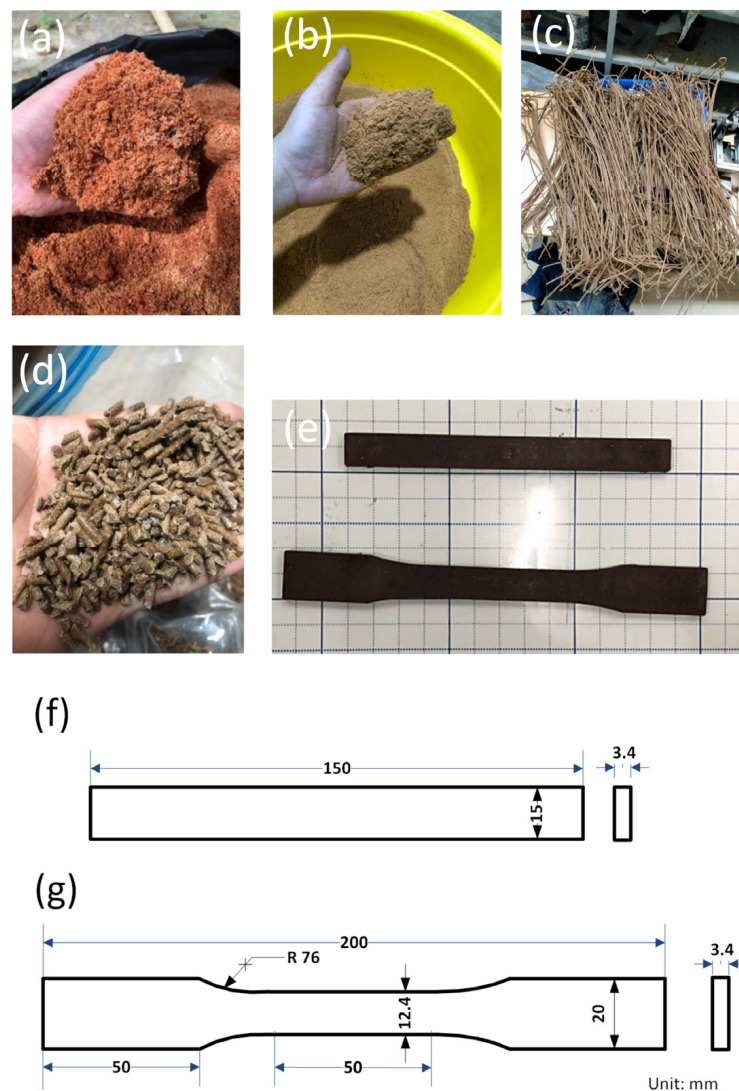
Sample preparation process: (a) coconut WP before filtering; (b) coconut WP after filtering; (c) coconut WP and PP after extrusion; (d) granulation; (e) tensile and flexural injection samples; (f) flexural sample dimension; (g) tensile sample dimension.
